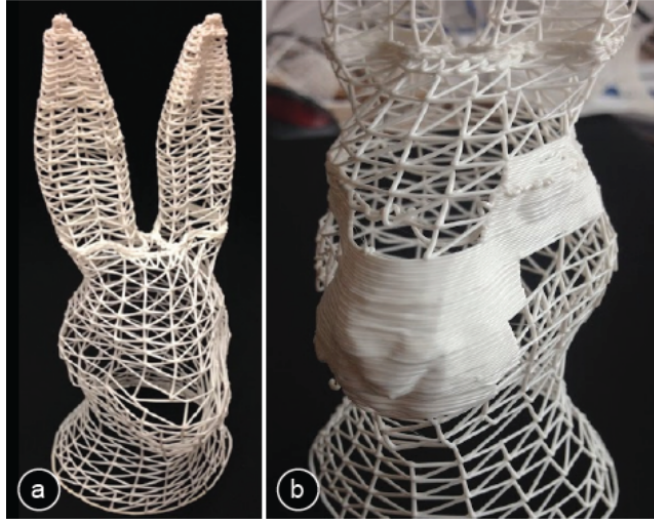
WirePrint (a) The basic shape of a design can quickly be printed and checked by carefully controlling cooling while making 3D depositions. (b) Additional details can be printed using conventional planar layers. From [123]
